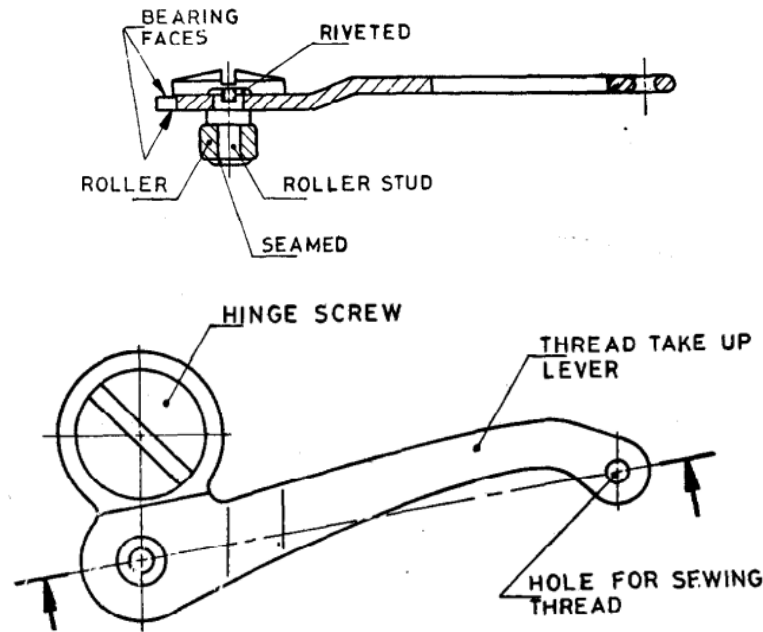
NOMENCLATURE FOR THREAD TAKE-UP LEVER SUB-ASSEMBLY
